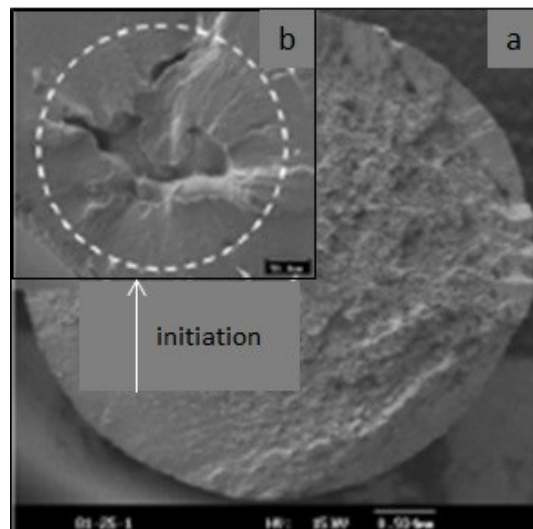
Fracture surface of a Ni based superalloy (a), crack initiation at a pore (see arrow) is magnified in Figure (b) [21,22].
